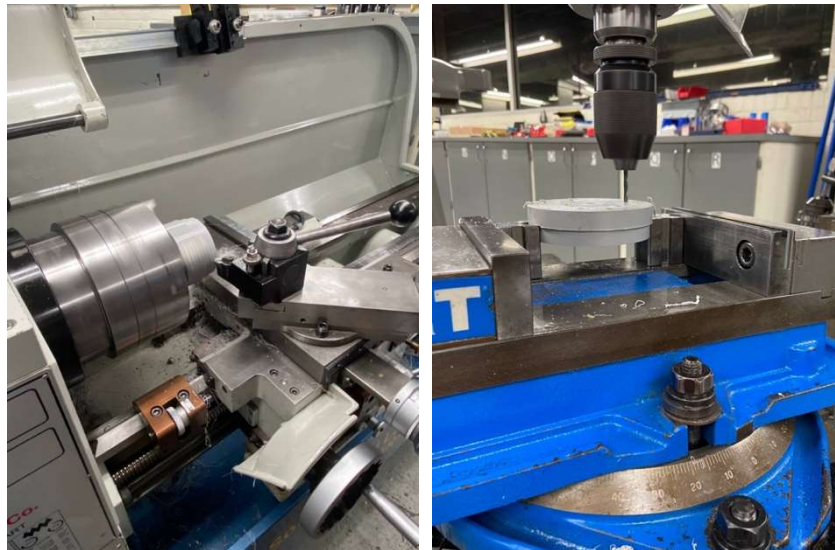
Turning the Bulkhead on the Lathe (left) and Drilling Holes on the Milling Machine (right)
